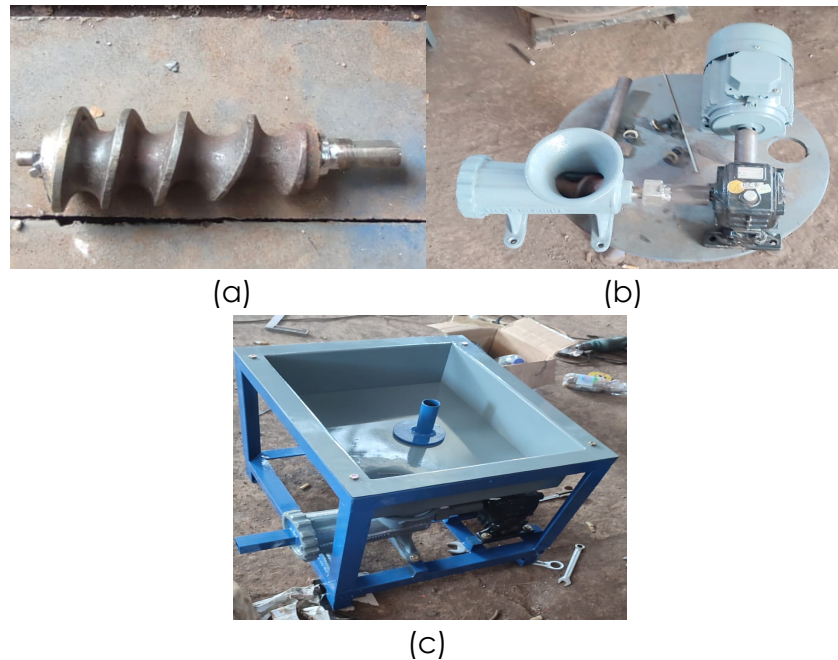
Manufacturing and assembly process of the briquette molding machine: (a) Screw shaft; (b) Machine component assembly; (c) Completed and assembled machine.
